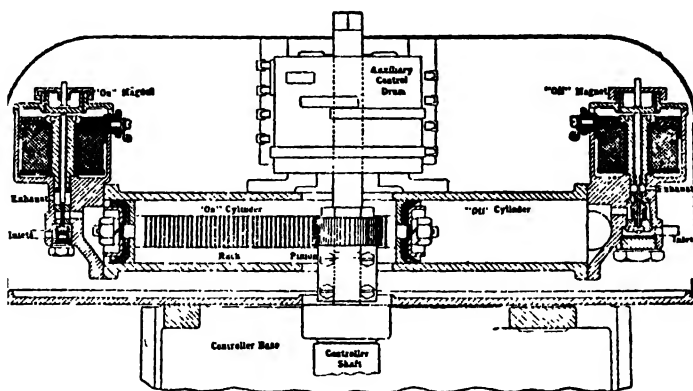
Section of Cylinder and Valves of Westinghouse Electro-pneumatic Operating Head for Drum Controller.
